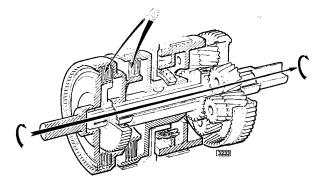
Mechanical power flow — Third gear (D1) selected
